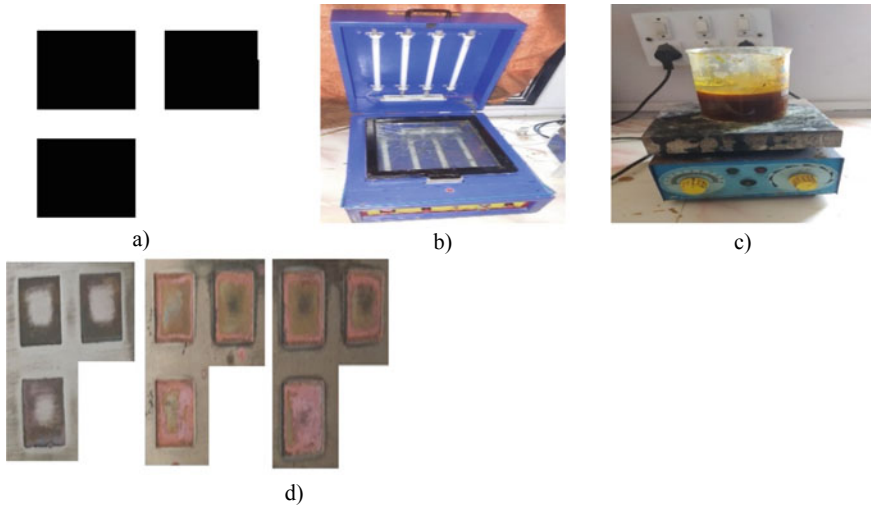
a Photo tool b Exposure unit c Etching unit d Finished component
